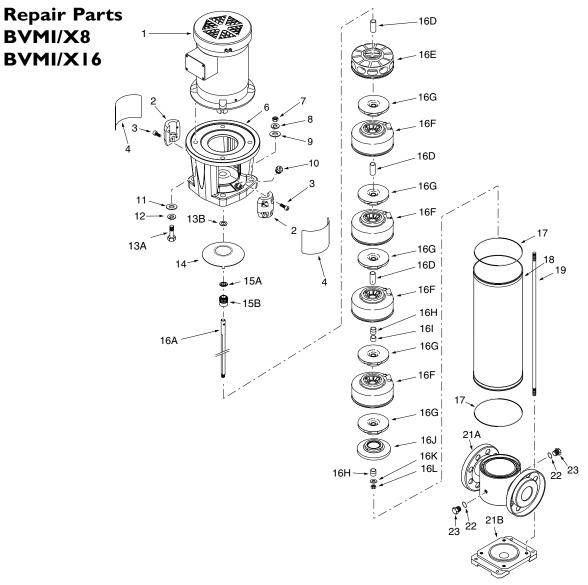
Exploded View BVMI/X8 and BVMI/X16
